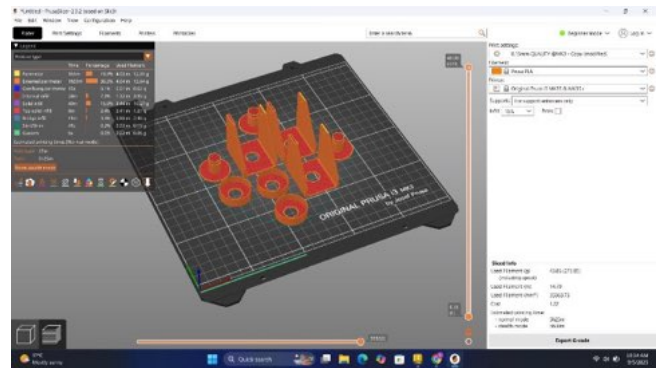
Castor wheel design slicing for 3D printing using Prusa Slicer
